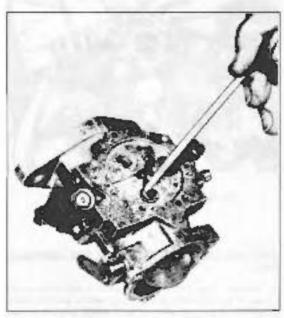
F-1B. Checking Main Noacle Ball Check Valve for Leakage
